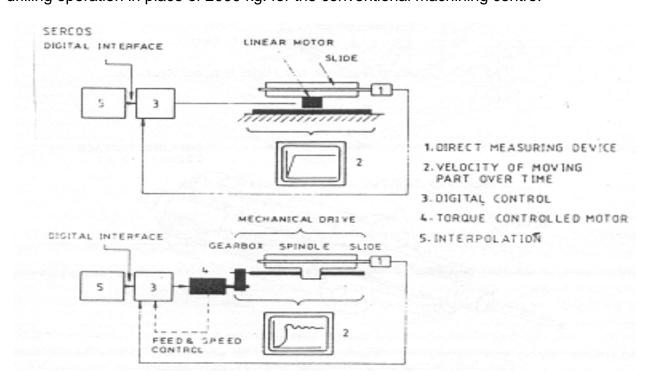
Liner Motor Drive Vs. Mechanical Drive.
